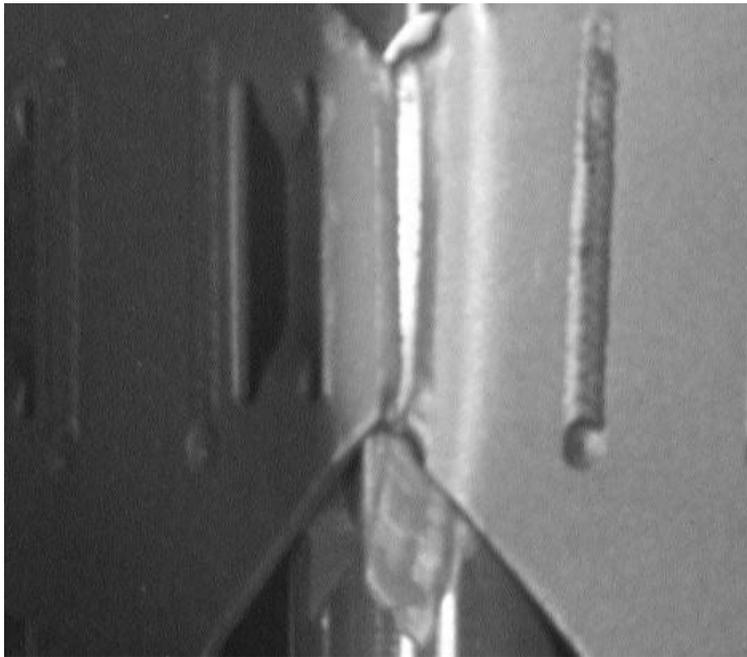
Marks on the corner fuel rod bottom end plug, WLTA AA02-03, juncture of faces 4–5.
